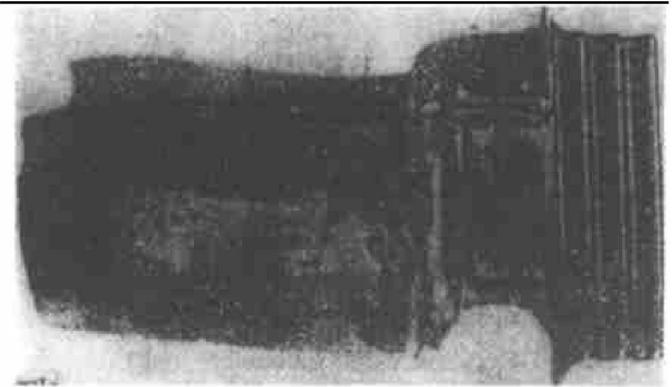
Surface morphology of a blade of gas turbine after high-temperature corrosion^[1]
